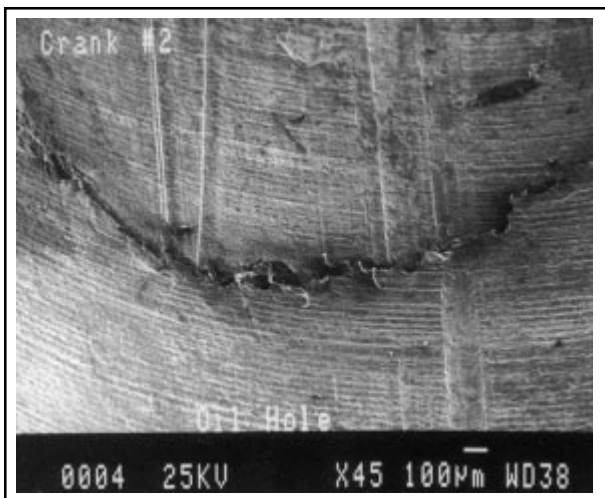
A drilled hole with tool marking that was altered by the woody textured fracture plane
